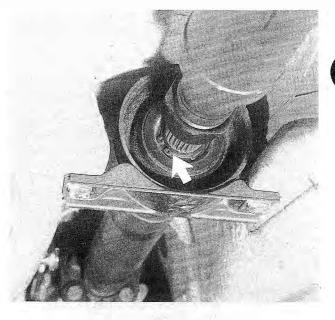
Center bearing circlip (arrow) to be removed. Driveshaft shown installed.
